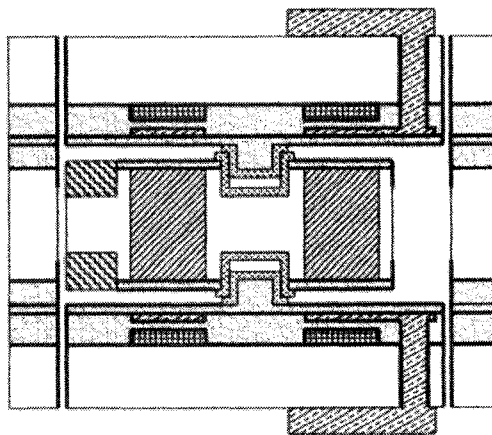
Assembly & Encapsulation step 3 – Solder pads patterning and rotor release.
